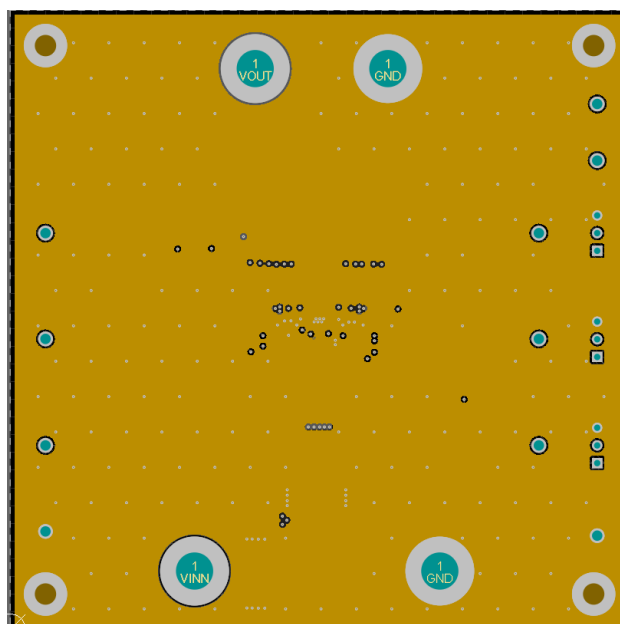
PCB Ground Layer (Directly Below Top Layer)
